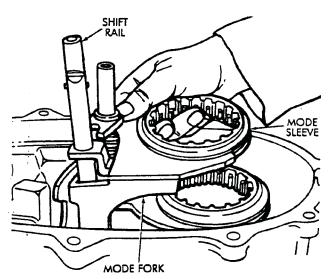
Remove Mode Fork, Shift Rail and Mode Sleeve
